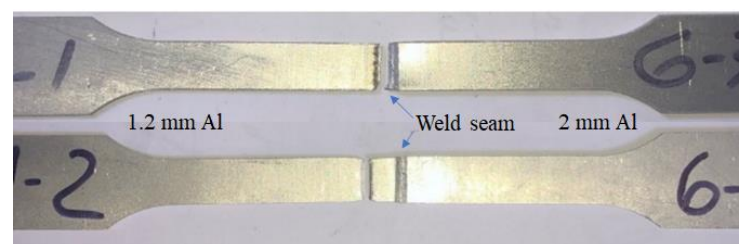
Examples of welded samples fractured in the welded joints (top sample) and the 1.2 mm thick aluminum sheet (bottom sample).
